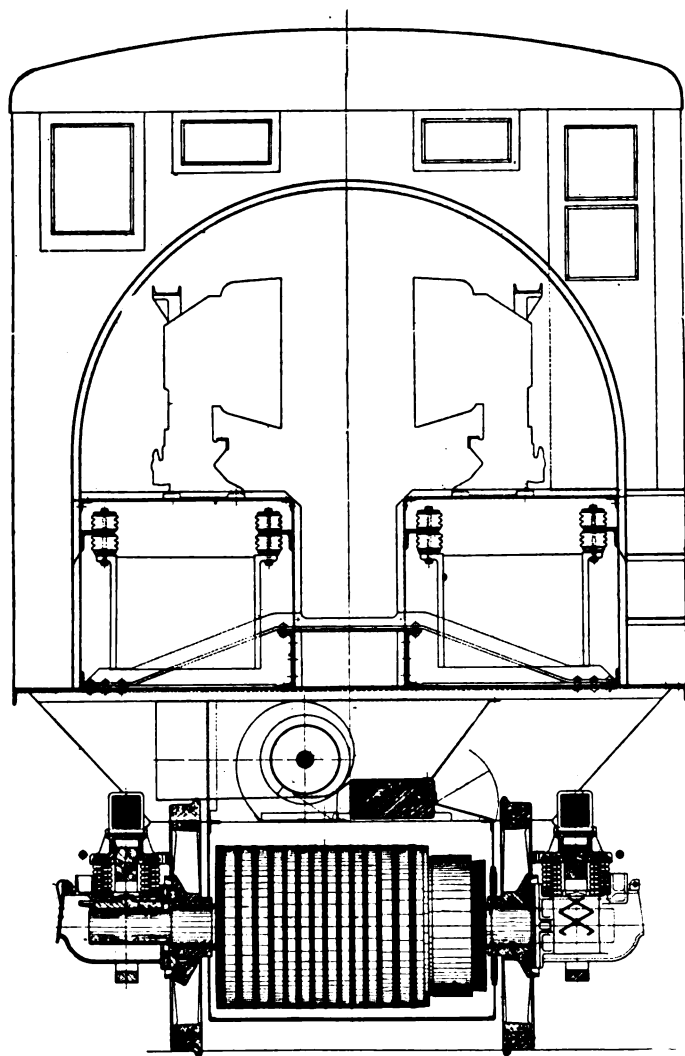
CROSS-SECTION OF APPARATUS CAB
